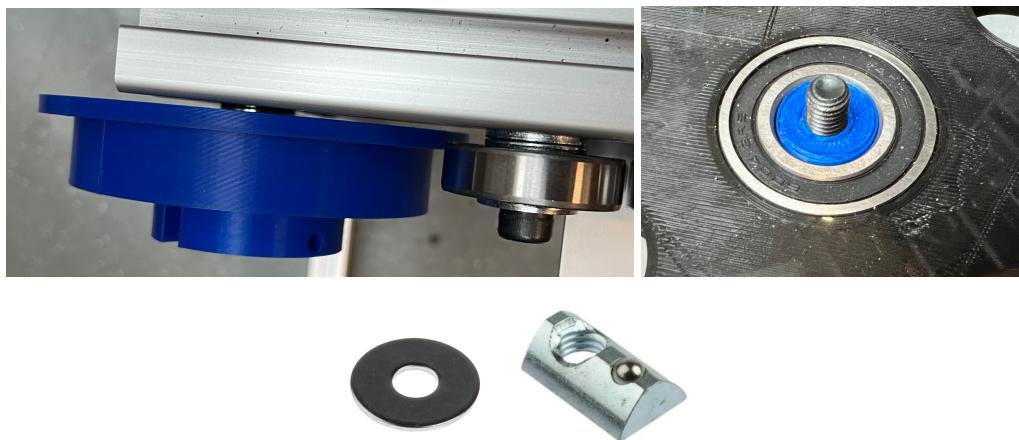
Blue roller with bearing inside and plain bearing connected to the frame (upper-left). Blue holder inside every bearing (upper-right). Washer (lower-left) and connecting component (lower-right).
